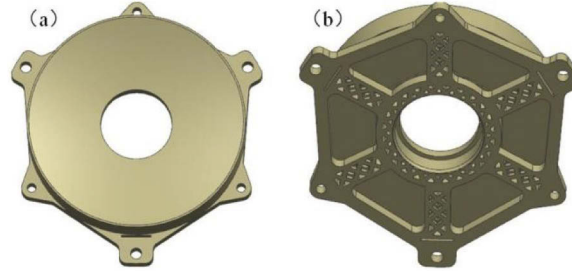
(a) front view of the mirror assembly, (b) rear view of the mirror assembly.
